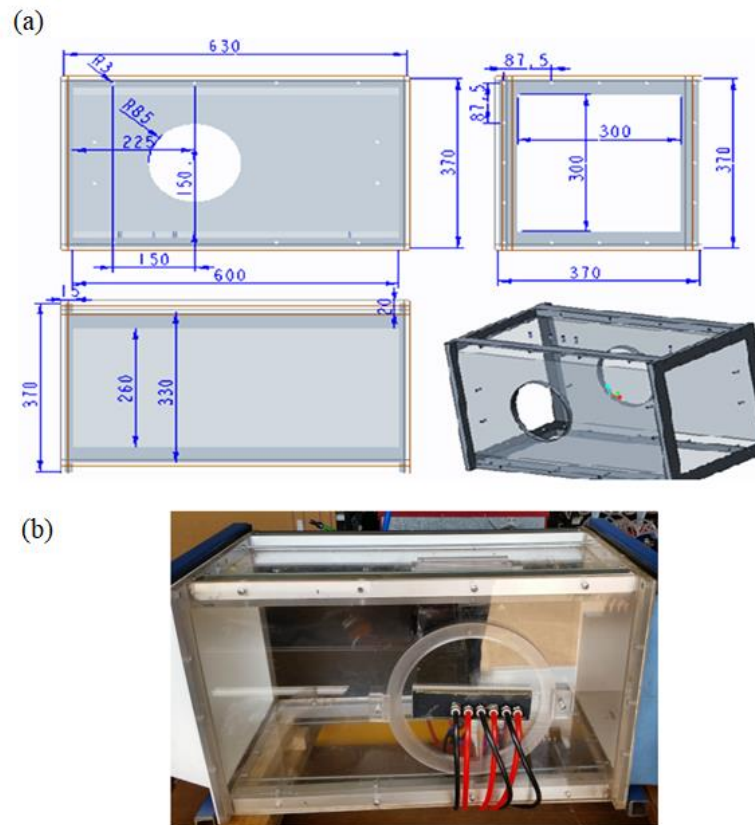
(a) The schematics of the wind tunnel working section; (b) its constructed form (All dimensions are in mm)
